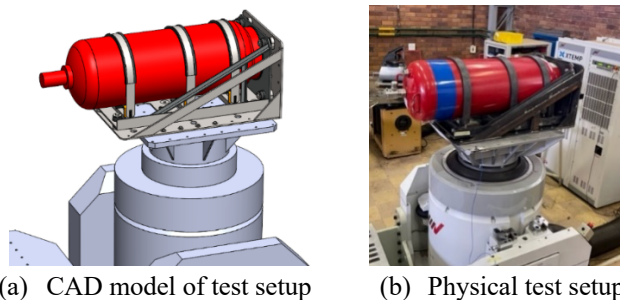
Representations of (a) CAD model of designed mounting bracket and test setup and (b) physical mounting bracket and test setup.
